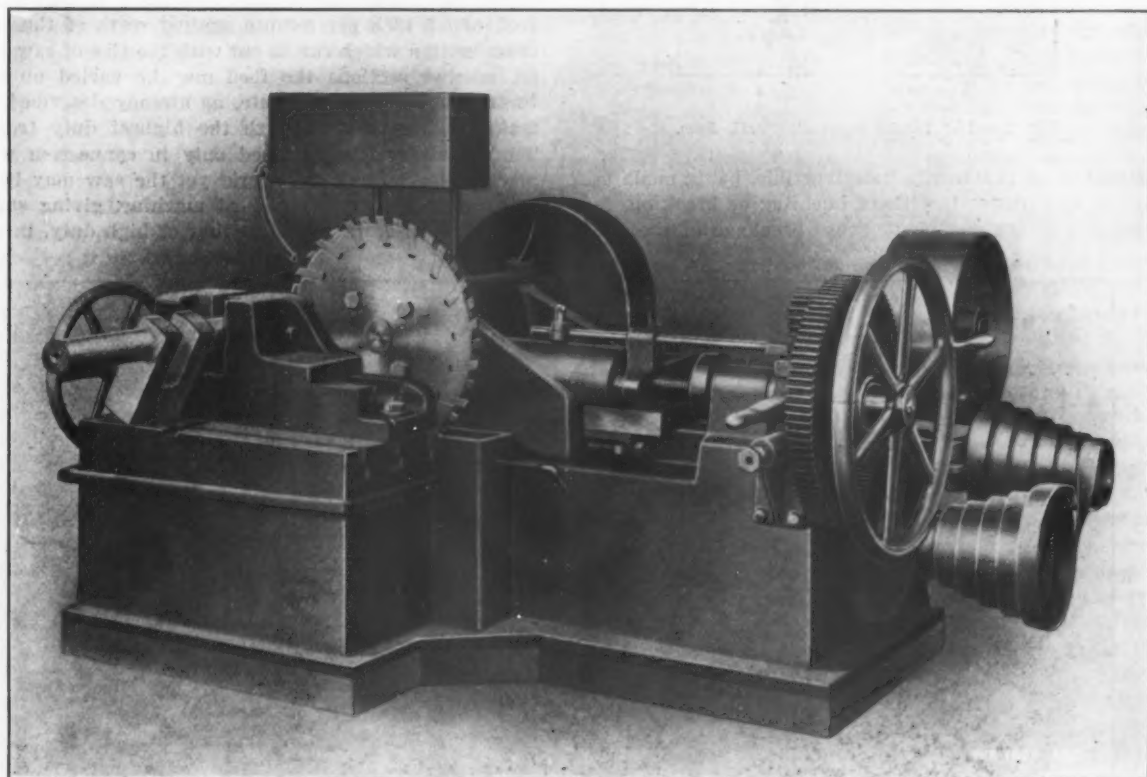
Rear Side View, Showing Stock Vise and Feed Mechanism.
